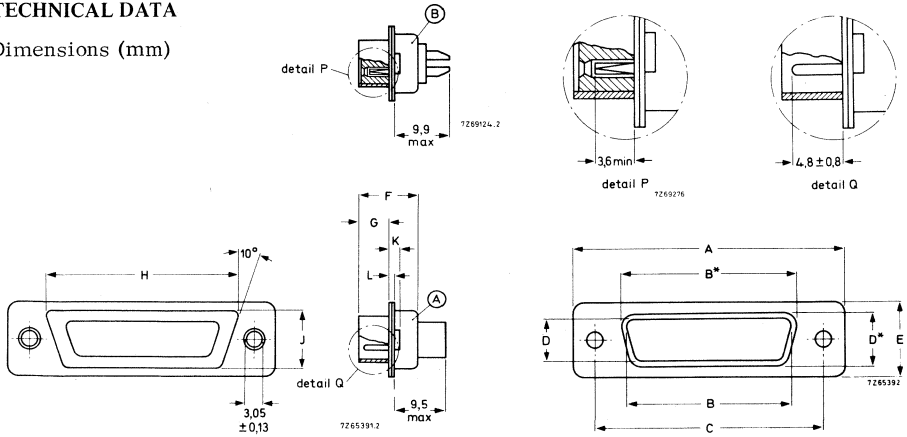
Outline dimensions of a pin connector (A) (crimp snap-in version) and a socket connector (B) (solder pot version).
